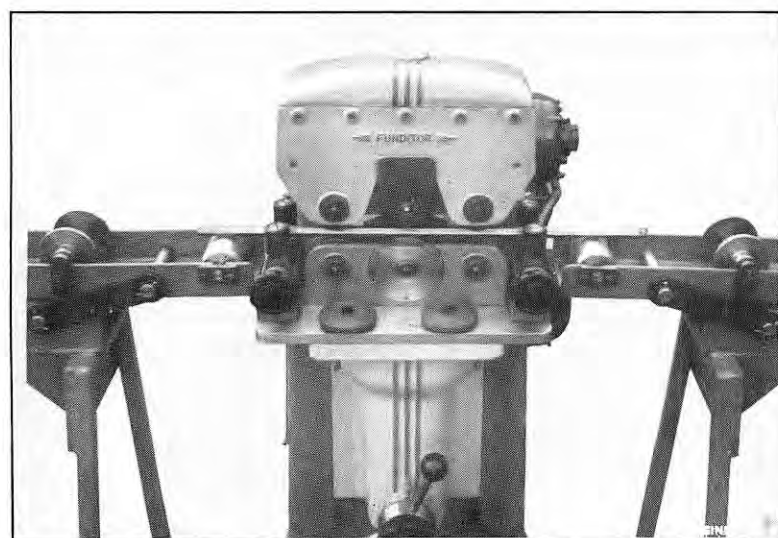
PNEUMATIC BAR-MARKING MACHINE; FUNDITOR, LTD.
